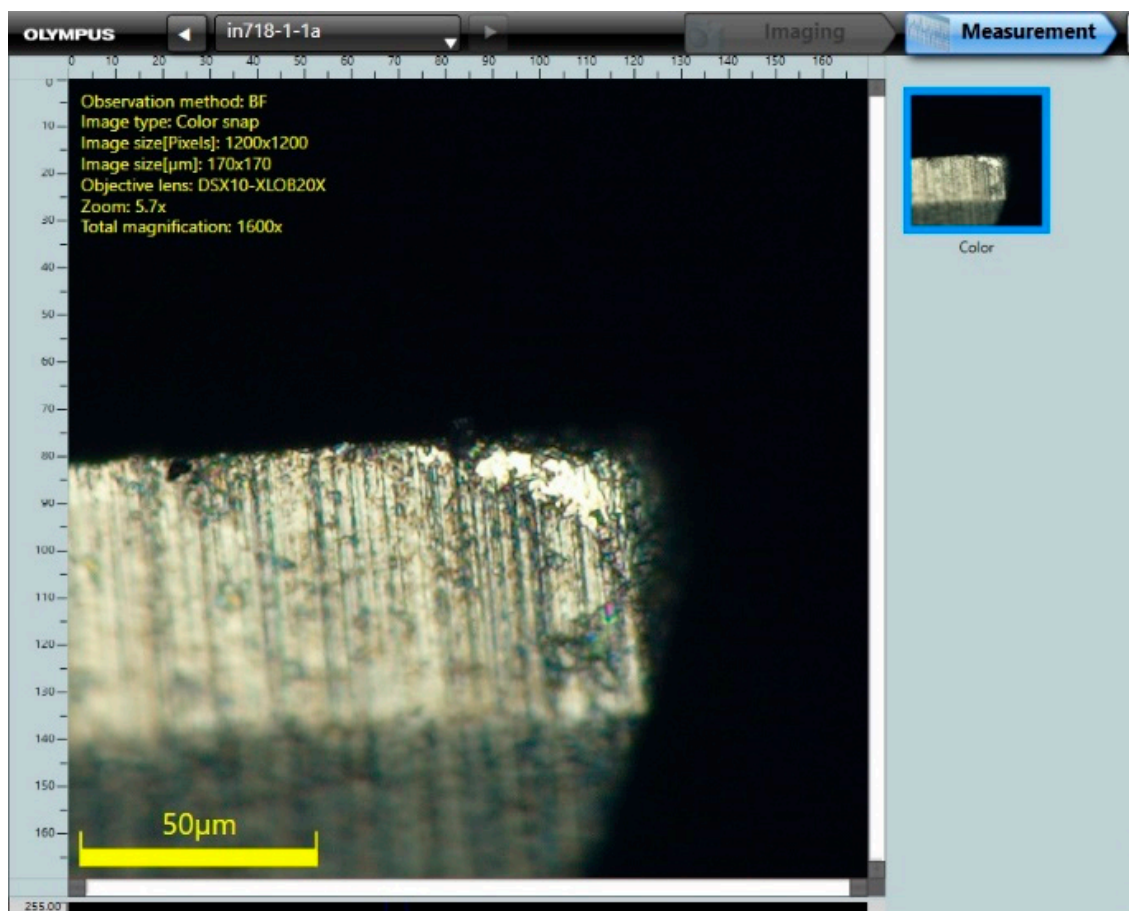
Close-up imagery of the milling insert highlighting tool wear.
